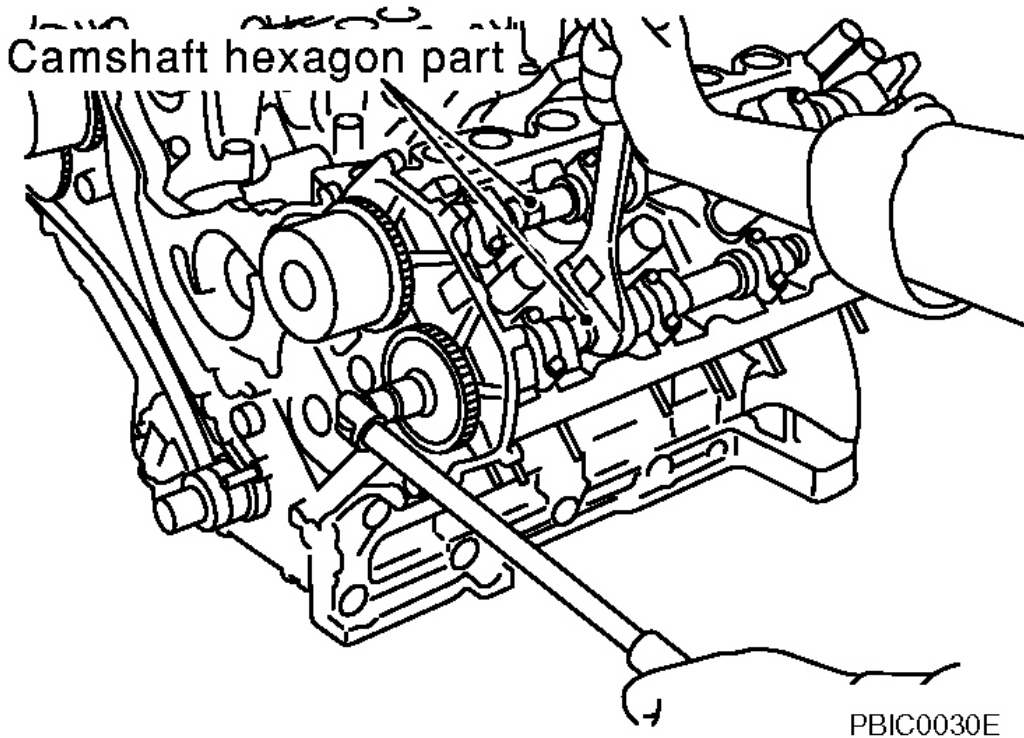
Removing Camshaft Sprocket By Loosening Bolts
